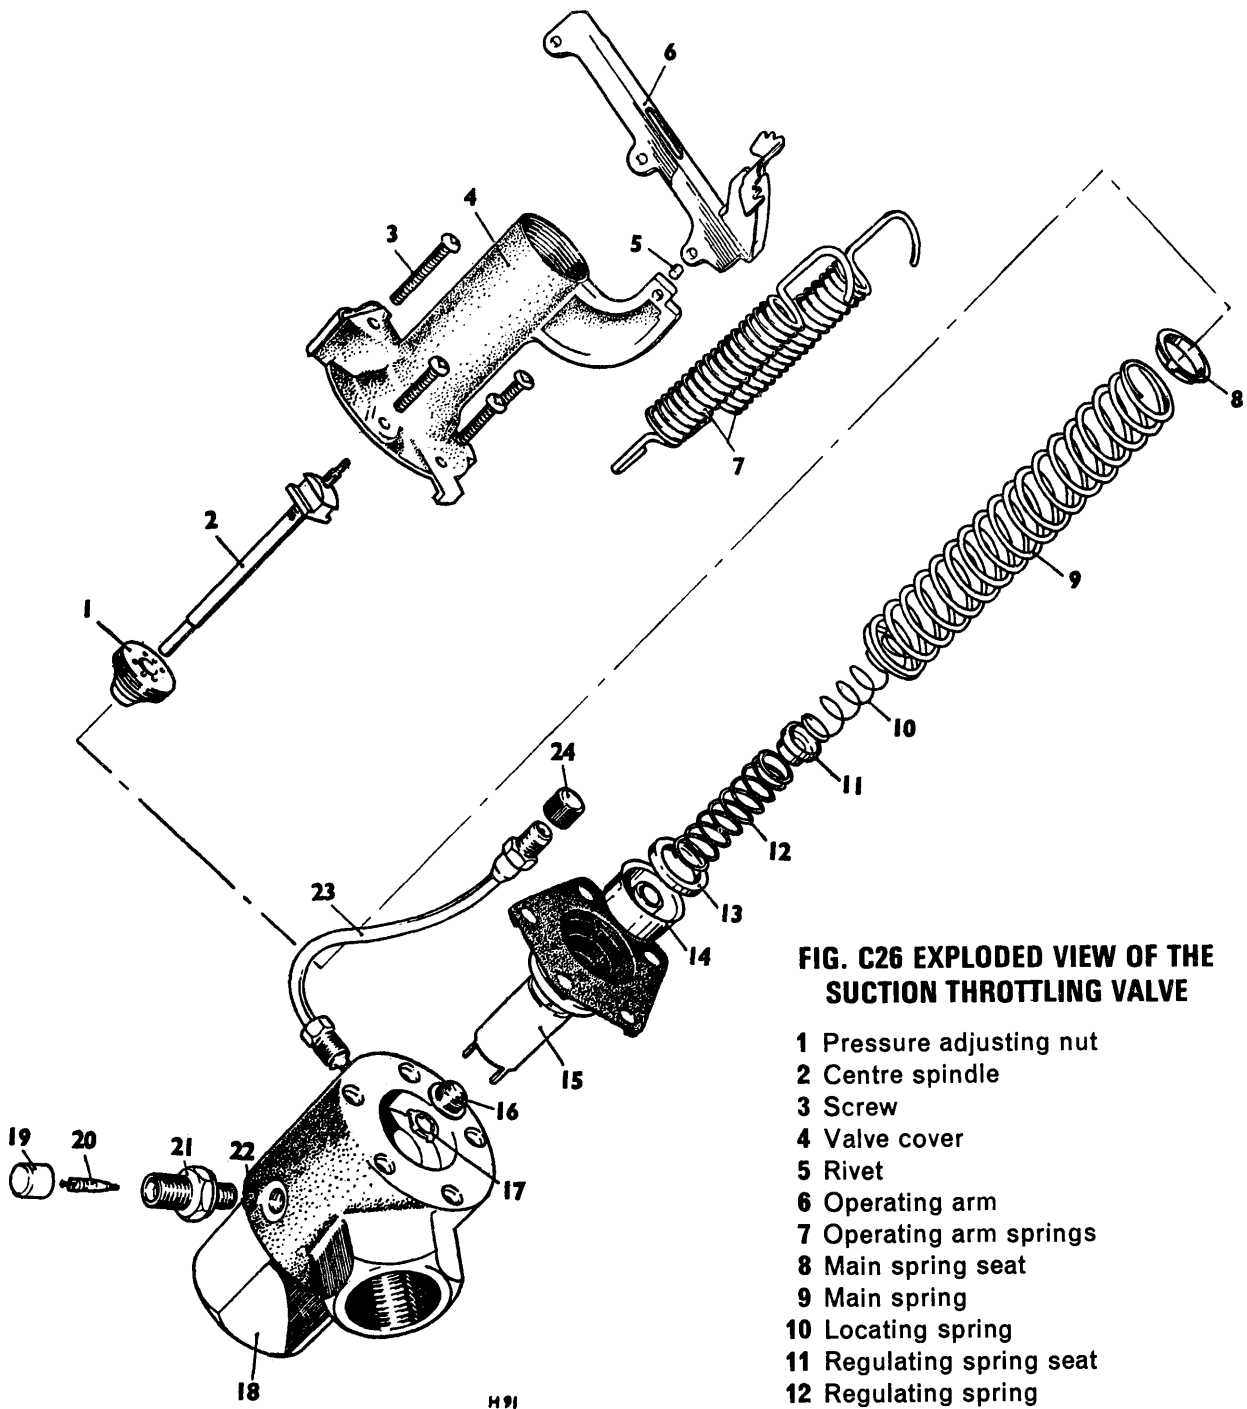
EXPLODED VIEW OF THE SUCTION THROTTLING VALVE
